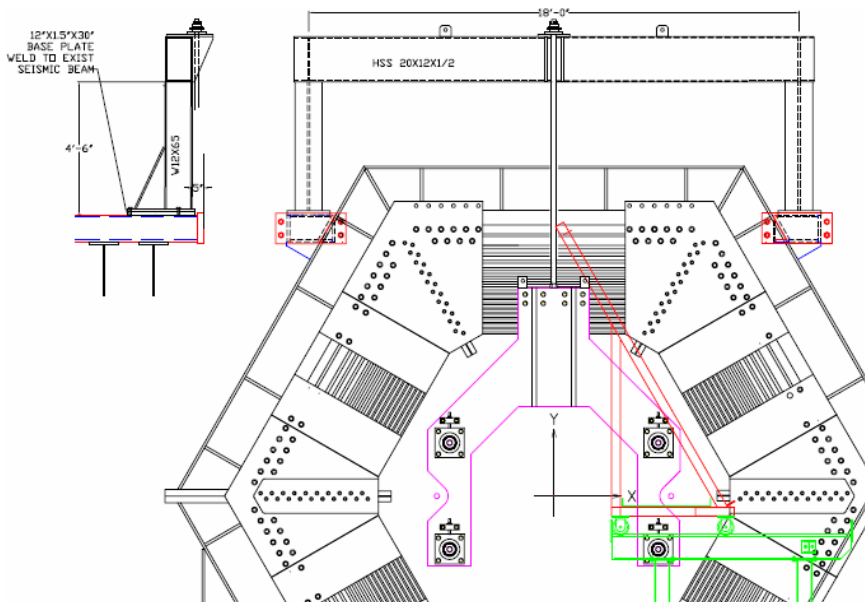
EMC load transfer fixture. Engineering and safety reviews have been completed for these fixtures.
